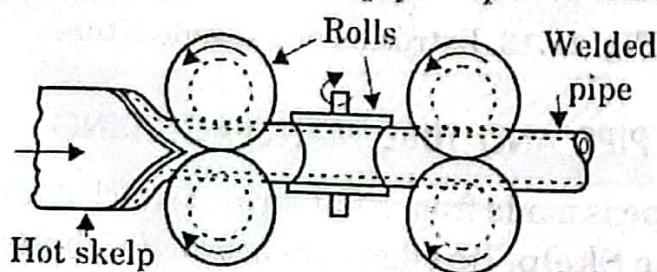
Production of a continuous butt-welded pipe.
